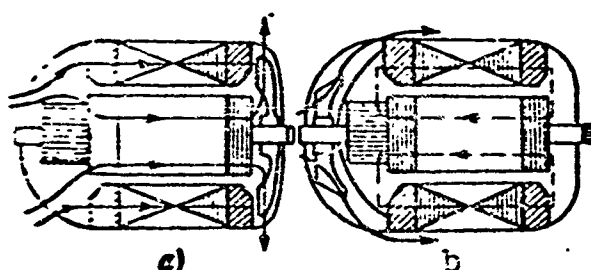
Diagram showing self-cooling. a) Internal axial; b) external axial.
